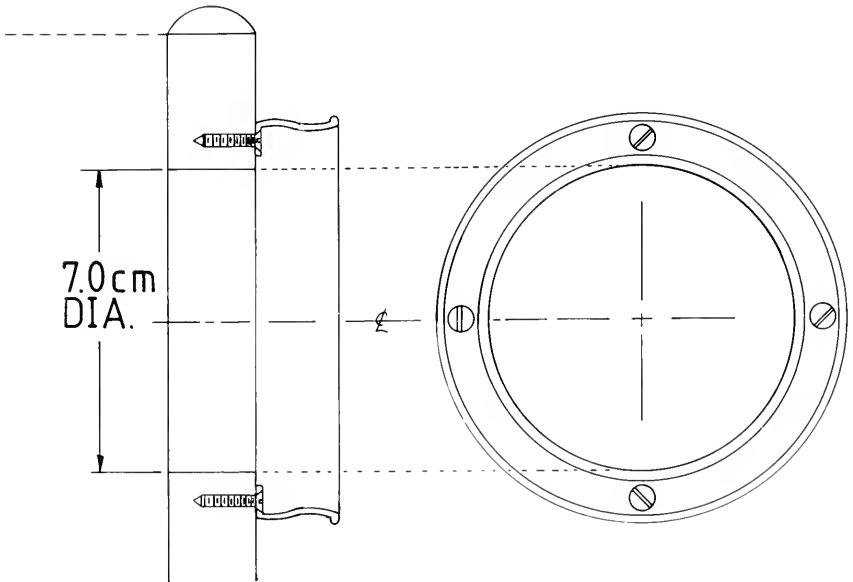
Flat head screws fasten the jar band to the perimeter of a hole 7.0 cm in diameter.
